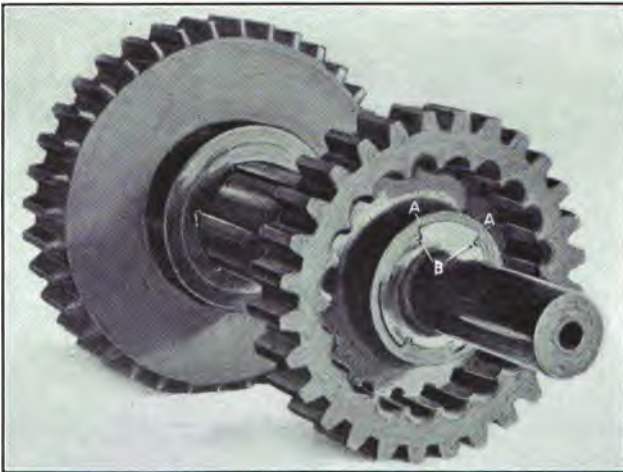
A.—Transmission gears, showing corner clearance on splined shaft.
